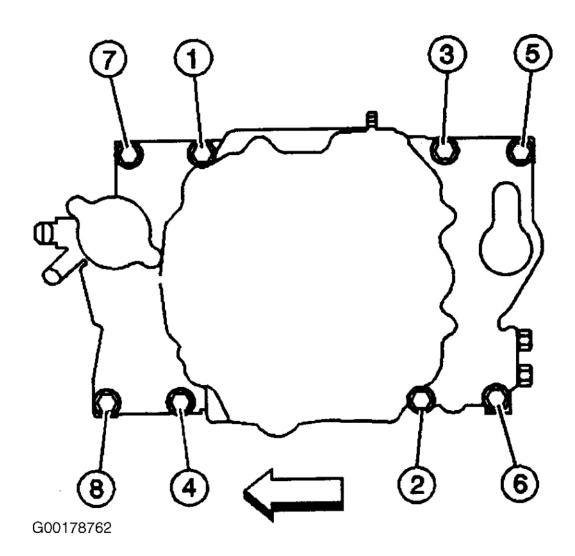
Identifying Lower Intake Manifold Bolt Tightening Sequence (4.3L) Courtesy of GENERAL MOTORS CORP.
